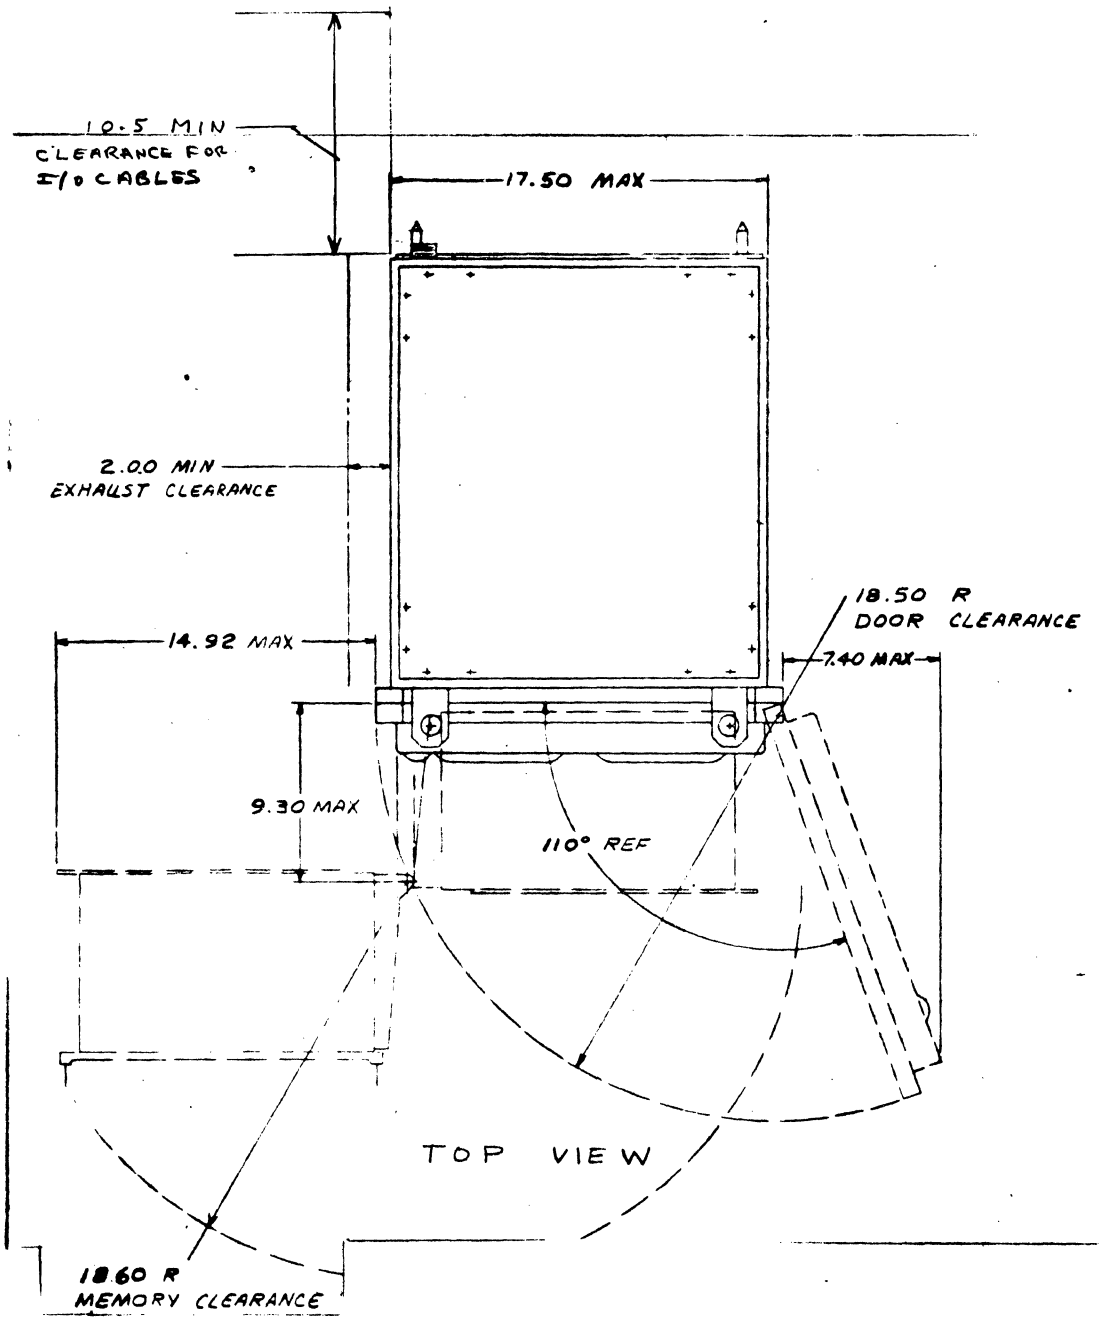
DPS Outline Drawing (To Serial 4)
